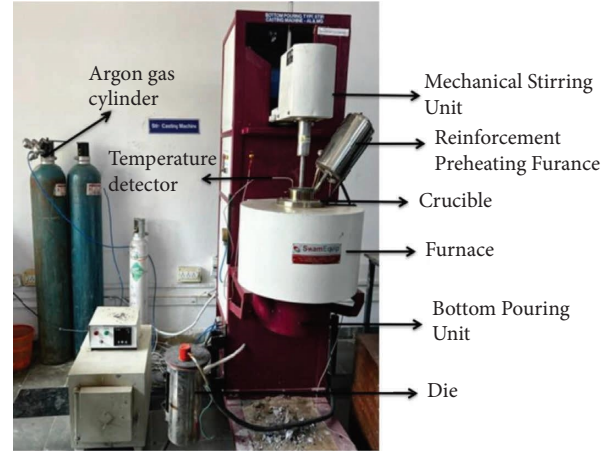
Photograph of the bottom pouring-type stir casting machine.
